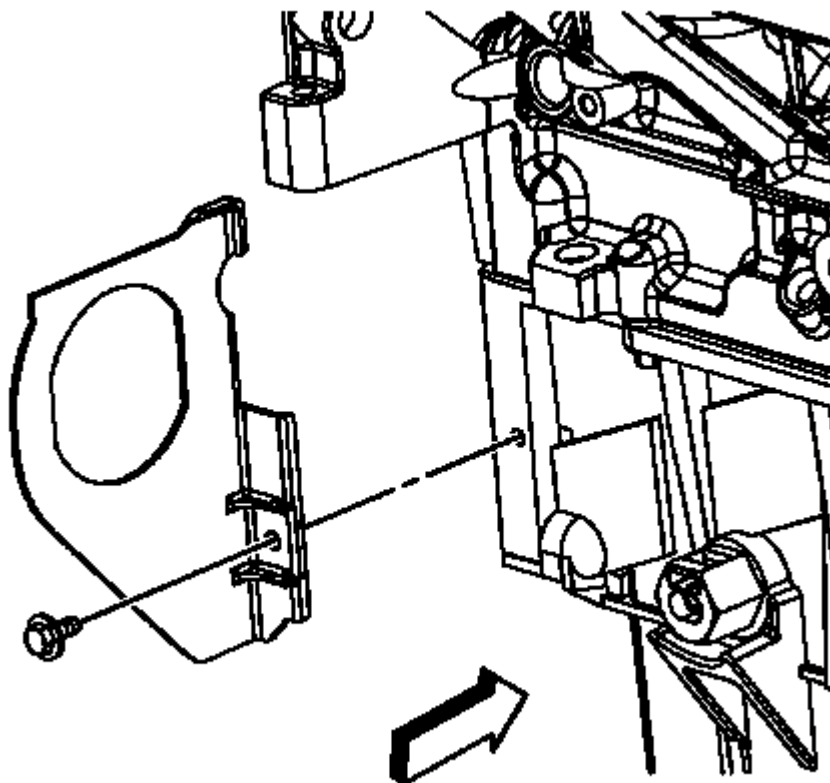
View Of Left Side Transmission Cover Bolt
